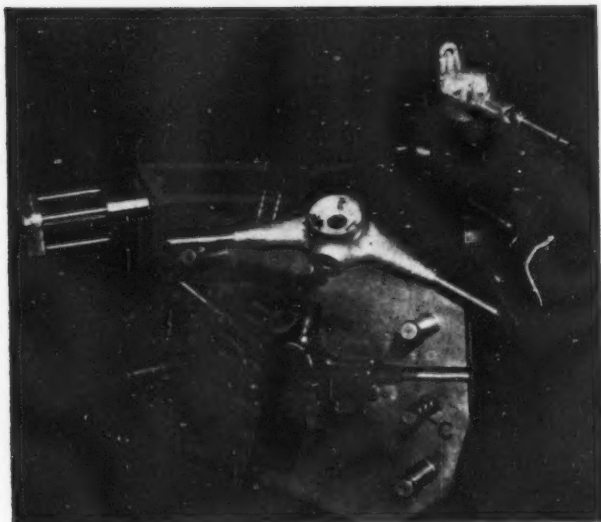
The Pressure Die Cast Handle-bar for the 175 TV Lambretta Scooter Incorporates Two Steel Tube Inserts for the Twist-grip Throttle and Gear-change Controls and is Made in this Die
